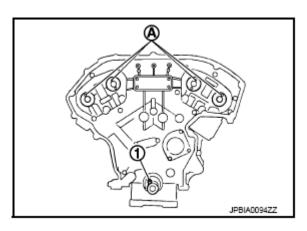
Identifying Crankshaft Key And Dowel Pin Courtesy of NISSAN NORTH AMERICA, INC.
